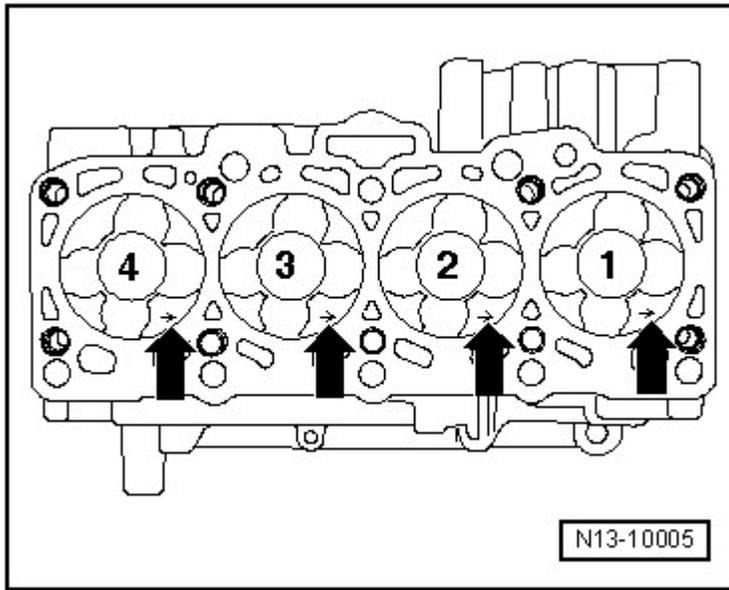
Identifying Installed Position of the Piston and Piston/Cylinder Allocation
